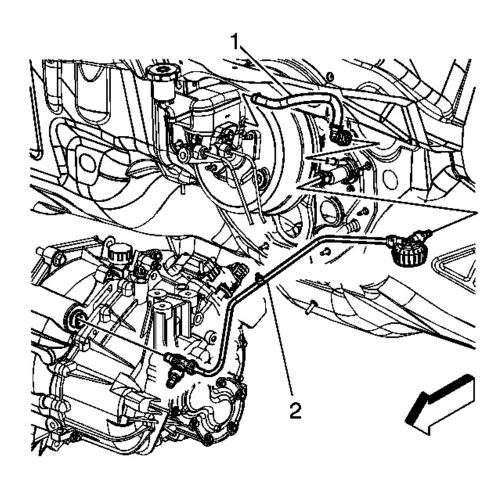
Clutch Line To Clutch Master Cylinder Courtesy of GENERAL MOTORS CORP.
